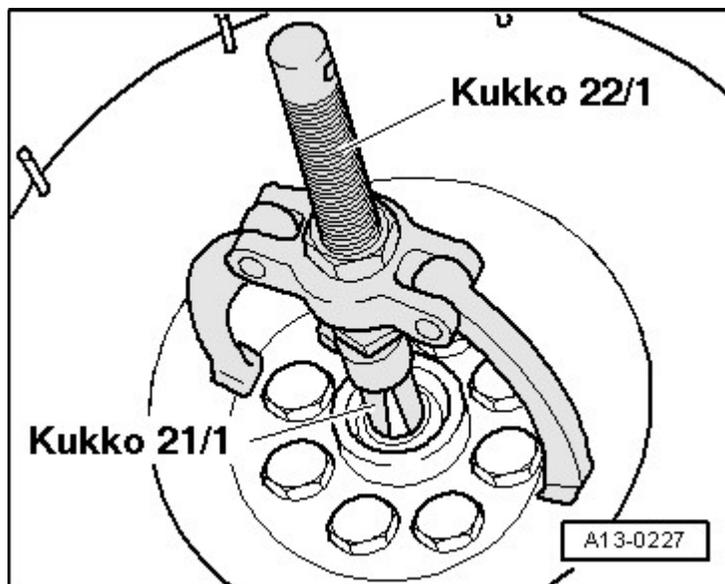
Pulling Out Pilot Needle Bearing Using Kukko 21/1 And Kukko 22/1
